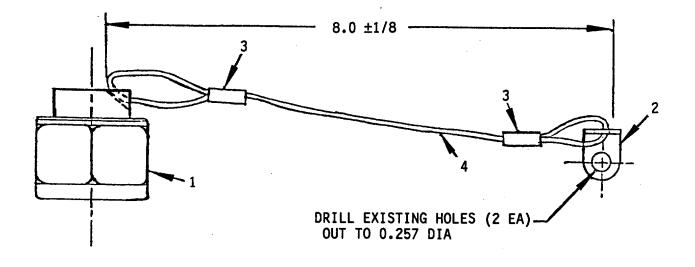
Fabrication of Gasket & Cover, PIN 85SDSCC-D-0007-120 & -123
